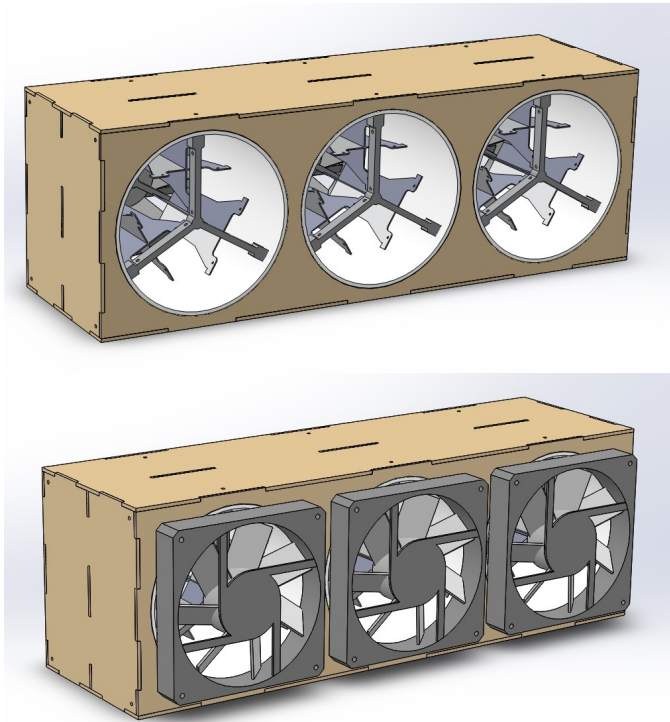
Top: front view of a duct package in *SolidWorks*<sup>®</sup>. Bottom: back view showing cooling fans.
